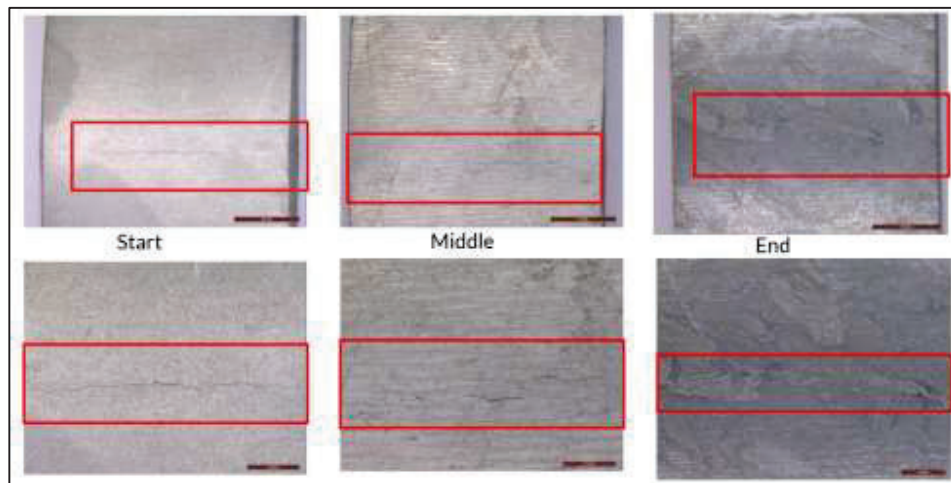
Crack formation in Start, Middle, and End sections of 71A 4072 2784 snake tool batch after V-Bend test
